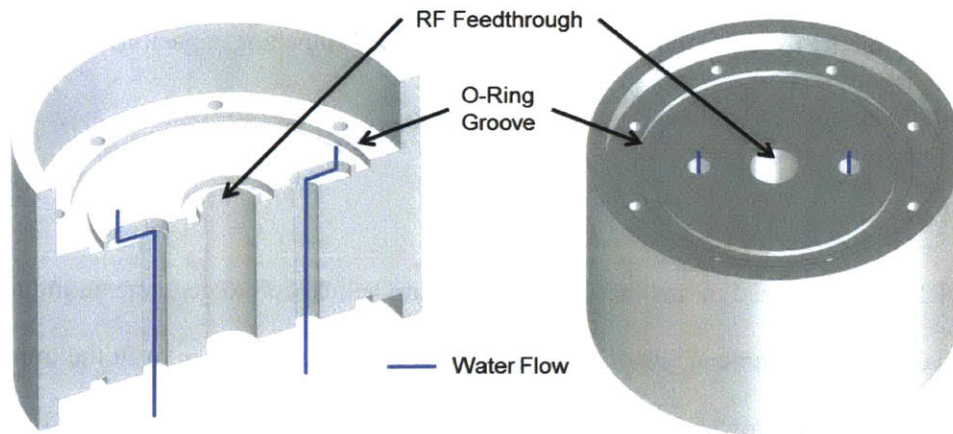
The chuck alignment and isolation block. Part a) shows a cut-away of the top view, with the path of the cooling water shown. b) shows the bottom view with the threaded holes for connecting the RF and water lines.
